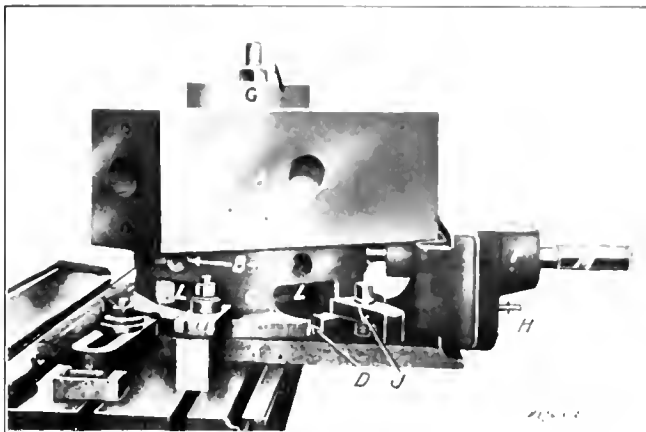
A Combination Boring, Planing and Milling Fixture.
